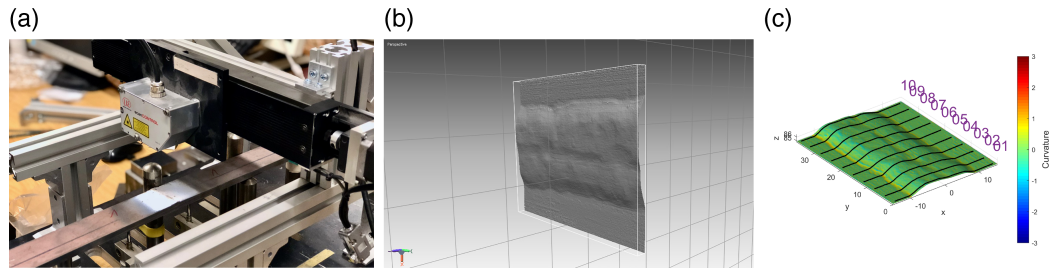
Scanning of the weld geometry of a S500 butt-welded joint (a), visualization to check scan quality (b), and assessment of geometry with 2D weld slices (c)
